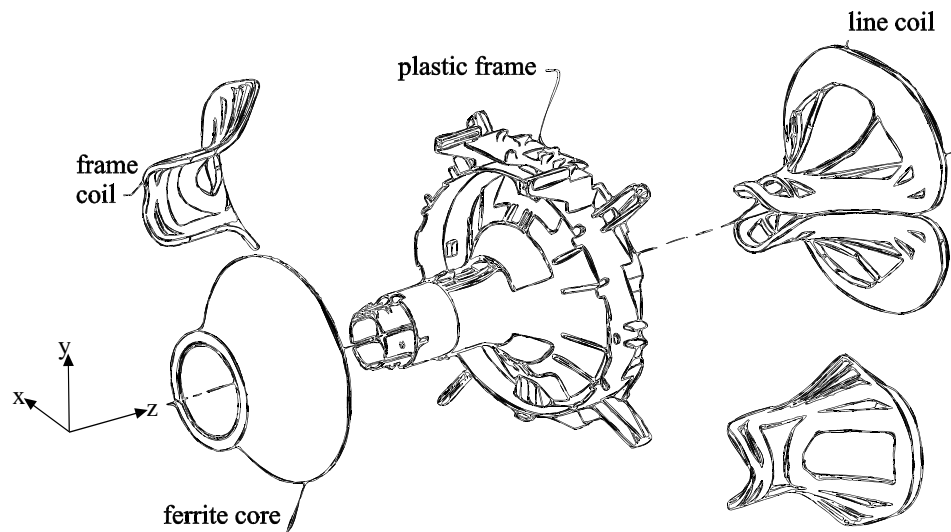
Exploded view of a deflection yoke seen from the side of the gun. The screen would be at the right.
